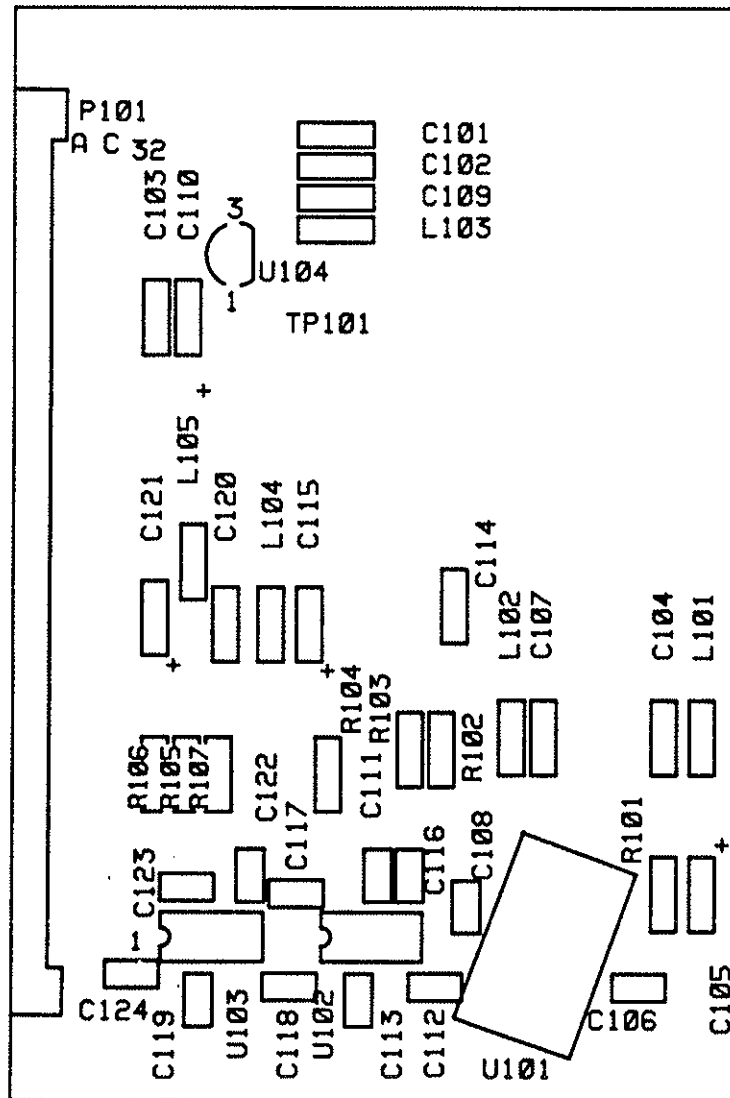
Component locator drawing, 1300-nm and 1500-nm fiber optic detector heads
